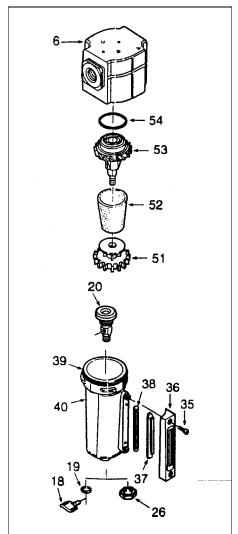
ACCESSORY AIR FILTER ASSEMBLY 12088
